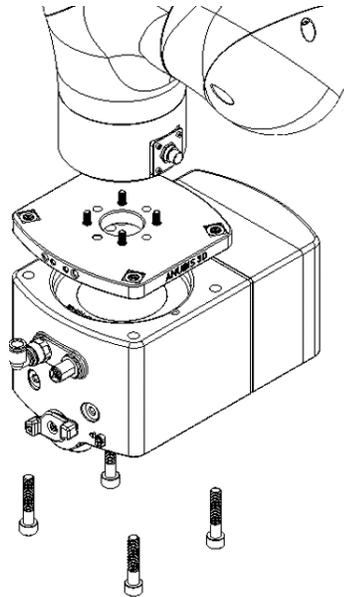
Connect adapter flange to robot flange. Follow tightening specifications per the robot system. Connect adapter flange to IVTC using provided fasteners.
